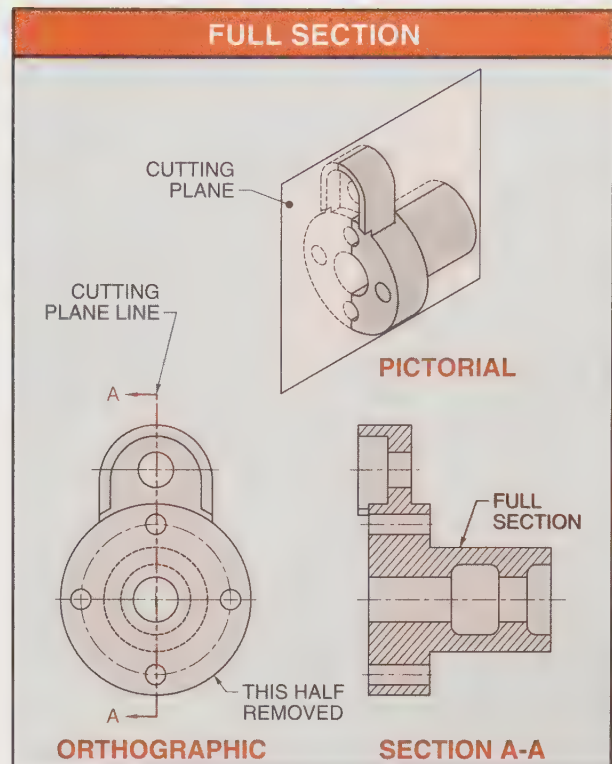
A full section is a sectional view in which the cutting plane passes entirely across the object.
